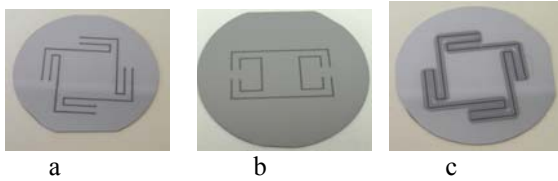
Comparison of actuator geometries using laser micromachining: a) and b) plane flexures c) plane flexures 50 μm deepening
